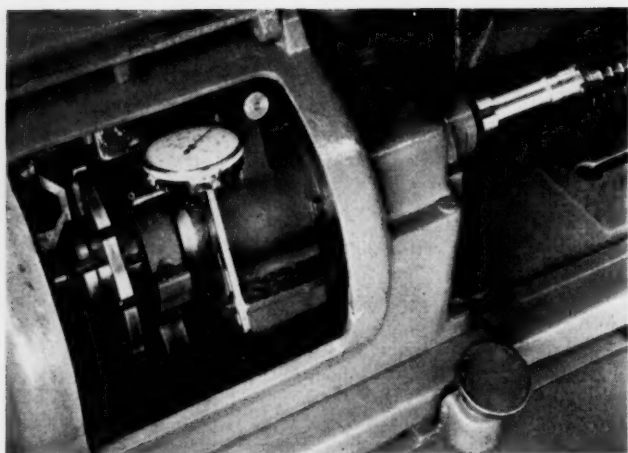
Setup devised for a No. 4 Barber Colman hob sharpening machine which gives operator control over the amount of stock he removes during sharpening.
